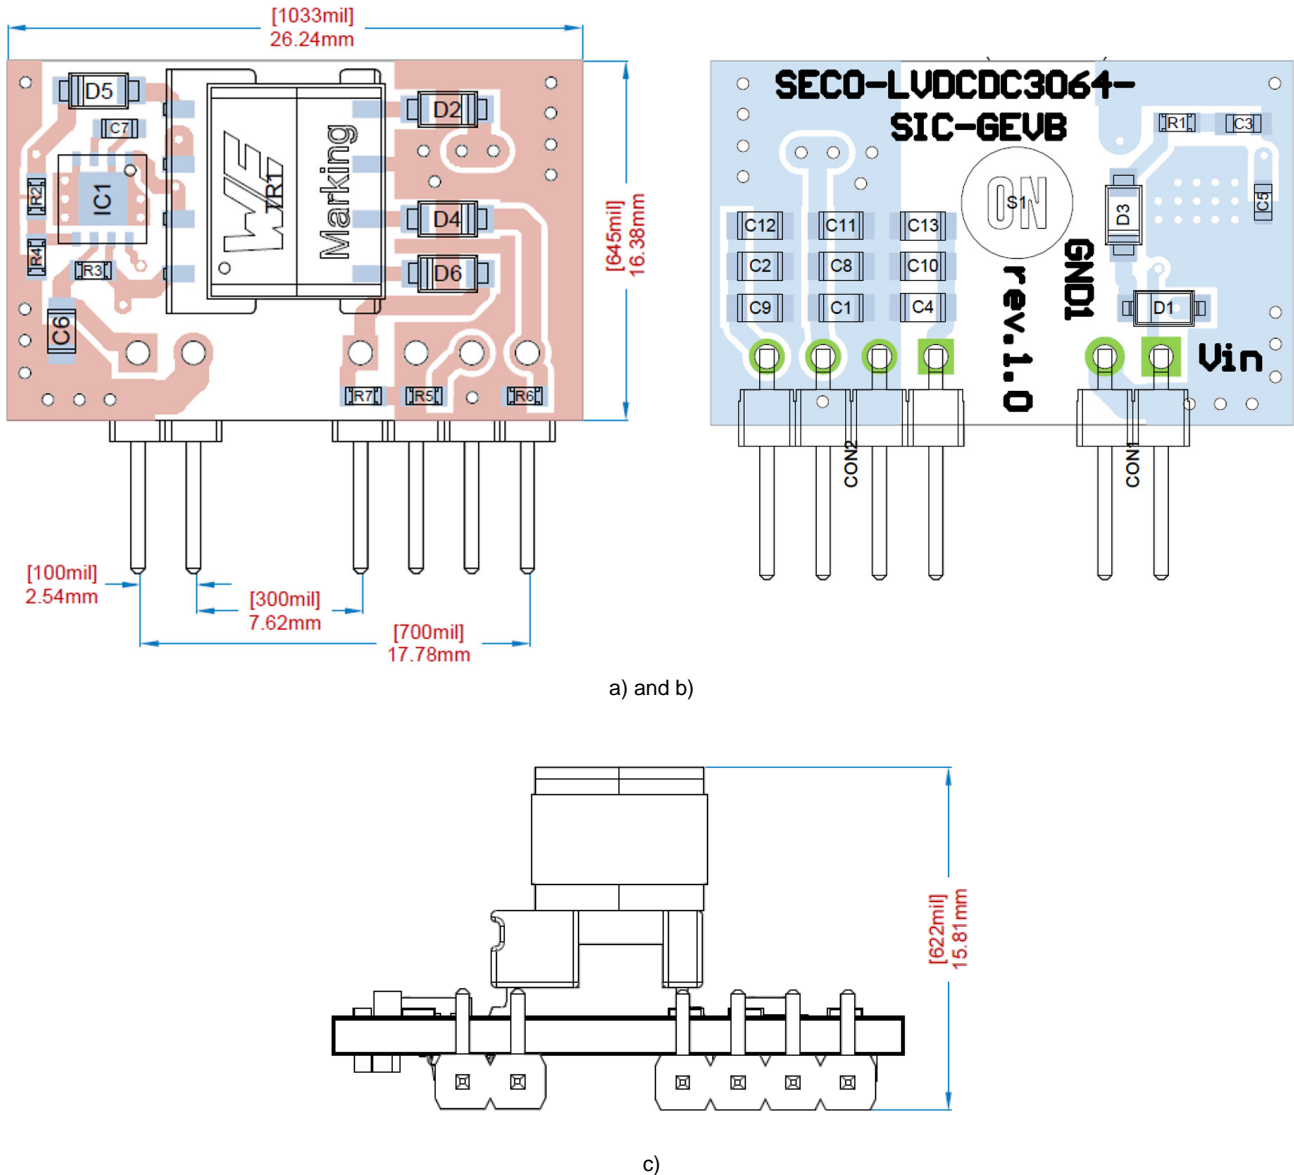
Board Layout: a) Top Side with Dimensions, b) Bottom Side, c) Front Side. Header is Pin Compatible with Standard DC/DC Isolated Supply Bricks.
